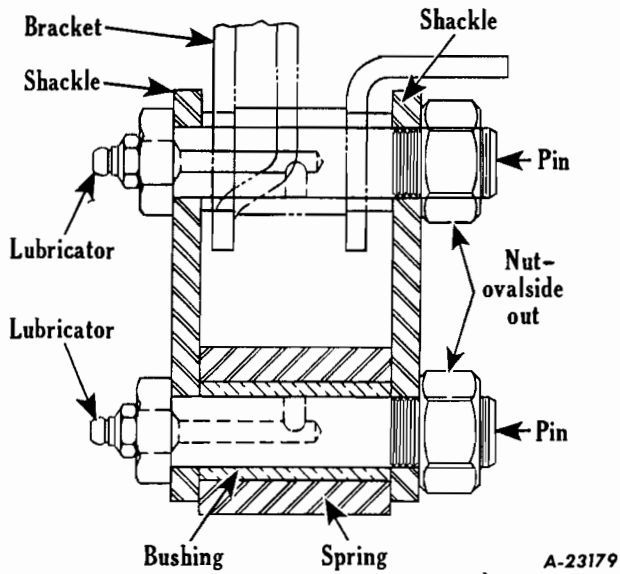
Front Spring Rear Shackle For Models L-130, LB-140, LM-150.
